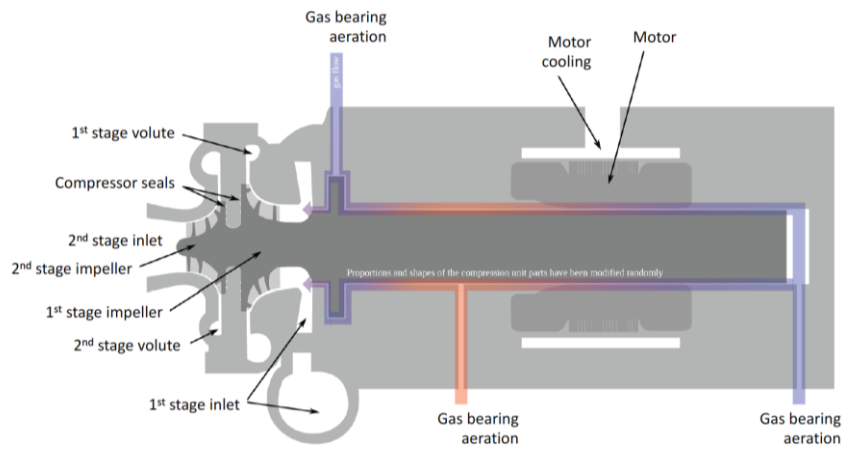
Schematic view of the two stage radial compressor on gas-lubricated bearings driven by a 6kW electric motor
